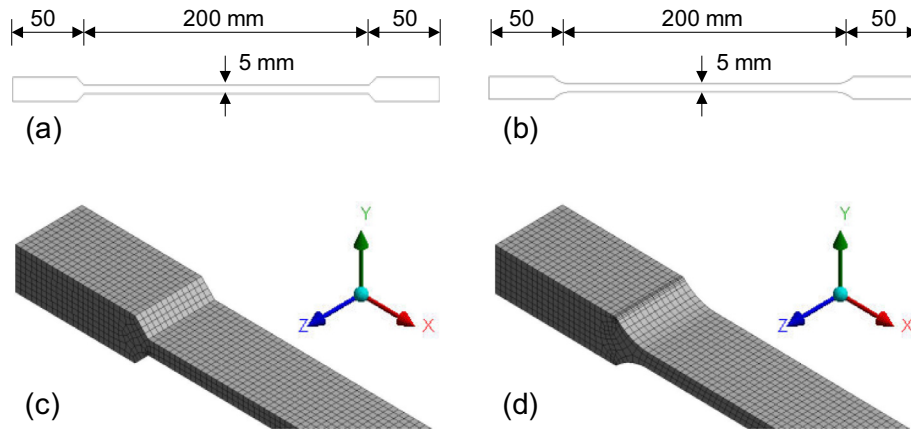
Tensile specimens (a) sharp-edge specimen, (b) round-edge specimen, (c) meshing of sharp-edge specimen, and (d) meshing of round-edge specimen.
